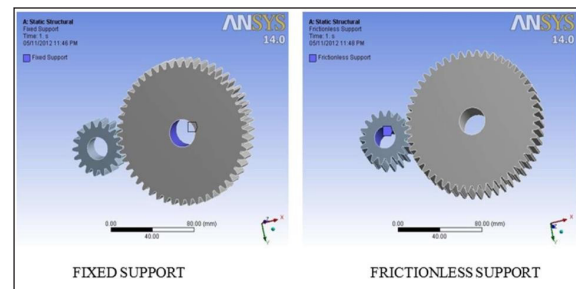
Pinion and Gear Assembly Stress Analysis of Mating Involute Spur Gear Teeth
